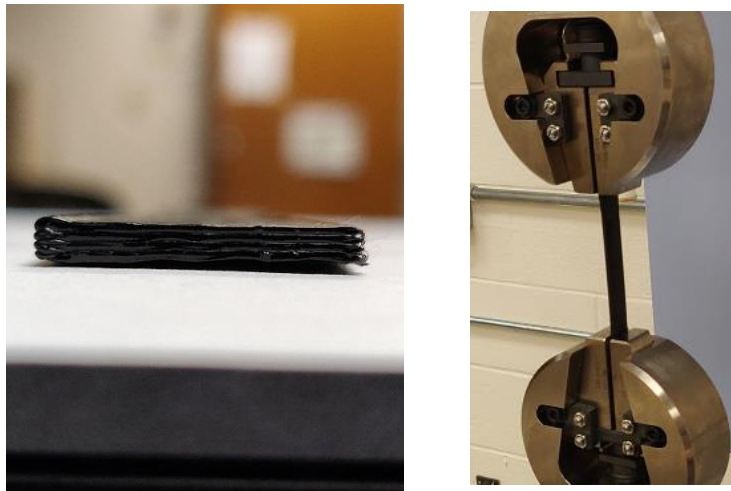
(a) Tensile test coupons with 4 bead arrangement and (b) tensile test of coupons on Schimadzu AGS-X universal testing machine
